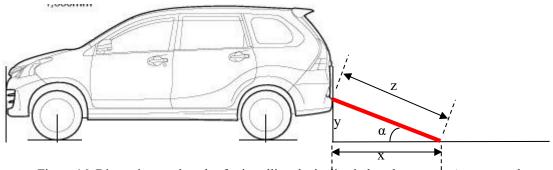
Dimensions and angles for installing the inclined plane base on an Avanza trunk
